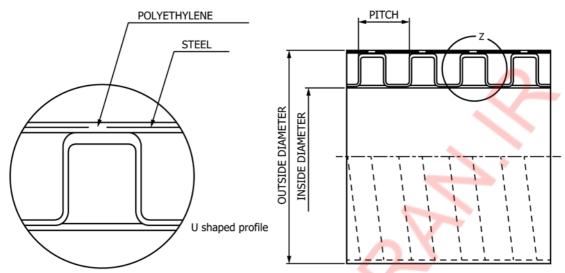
Triple-Wall Steel Reinforced Corrugated Polyethylene Pipe - Type IIB
